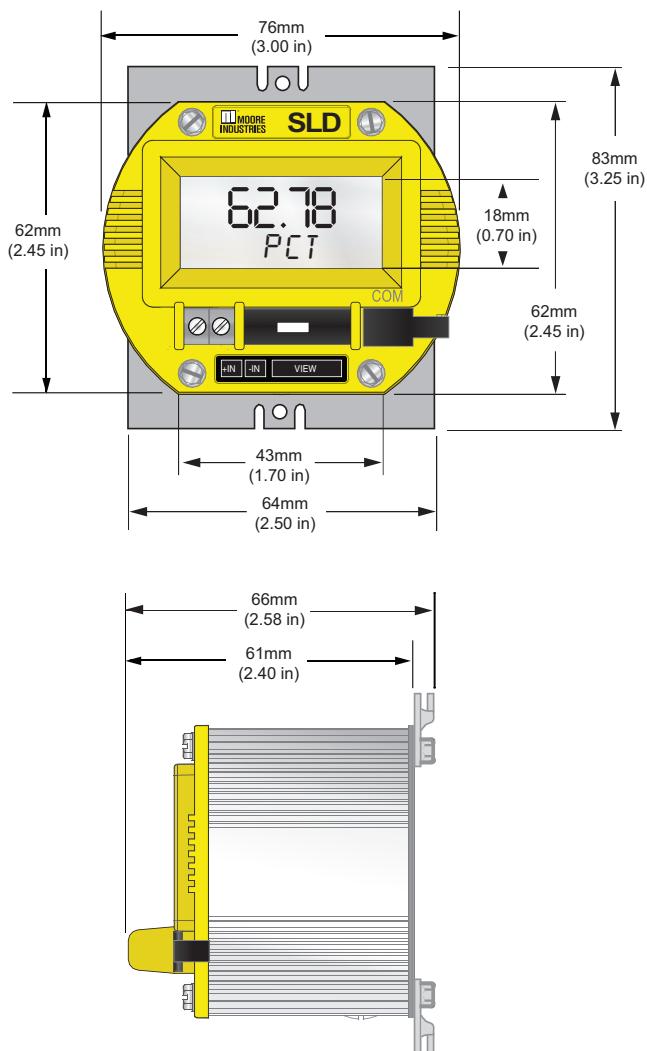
Dimensions of the SLD HP housing with mounting flanges.
